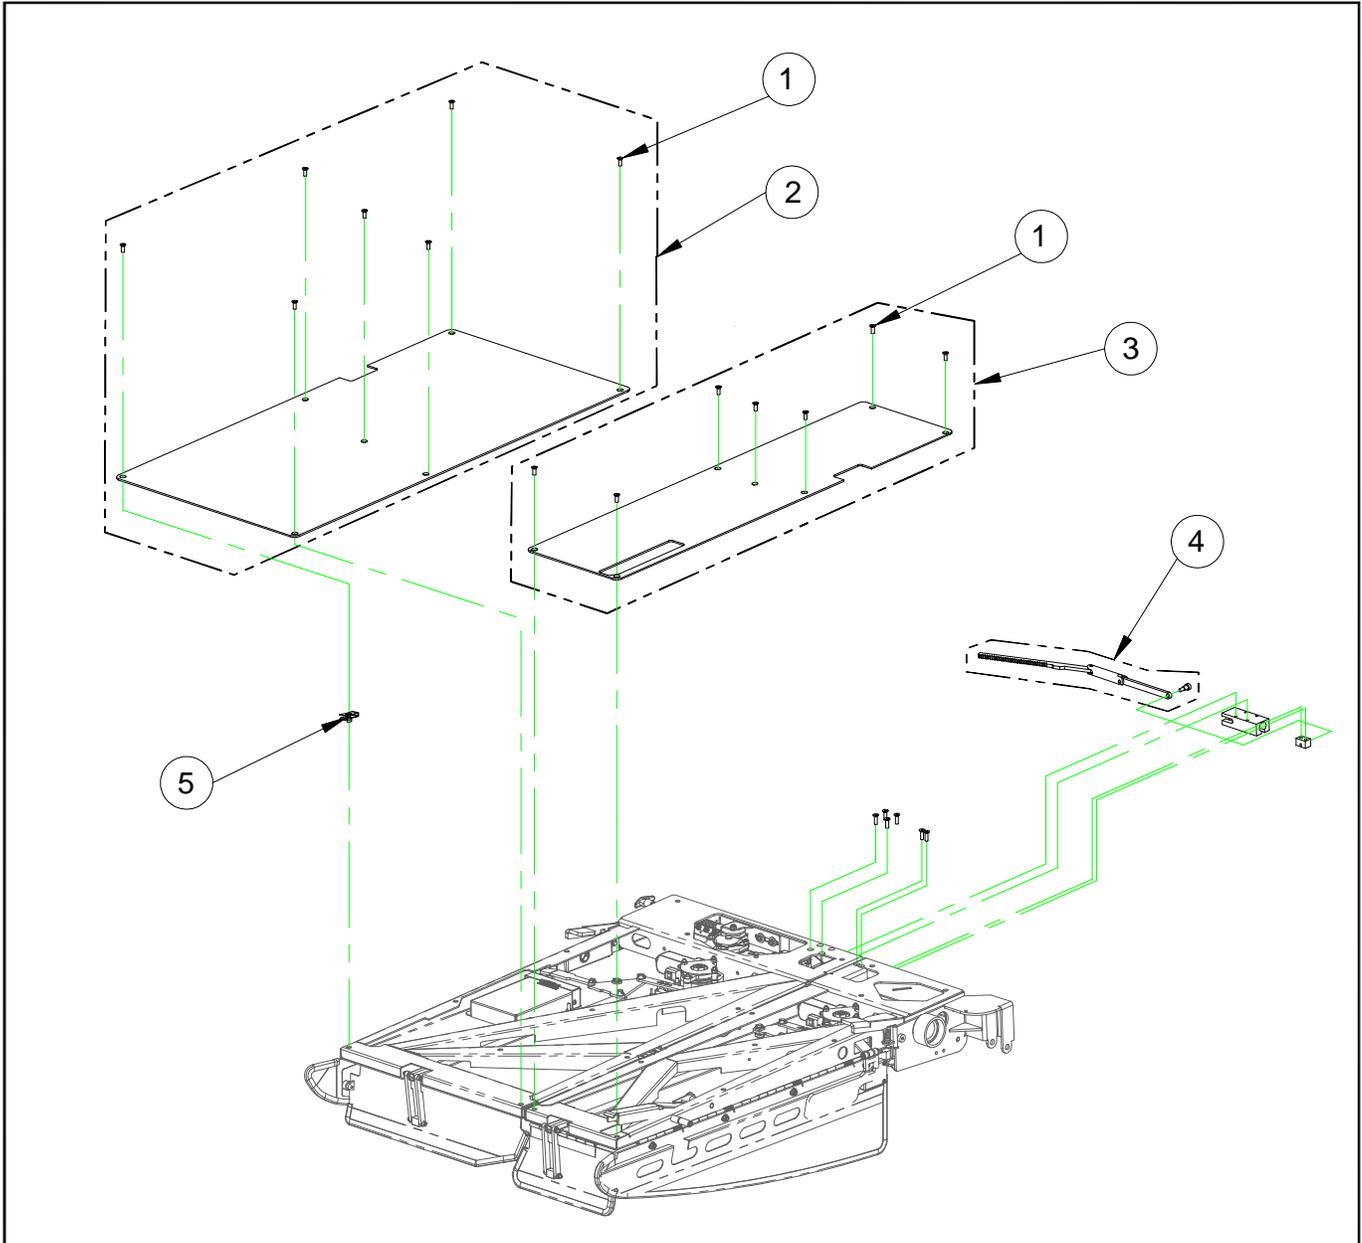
FRONT PLATFORM ASSEMBLY – SHEET 4
